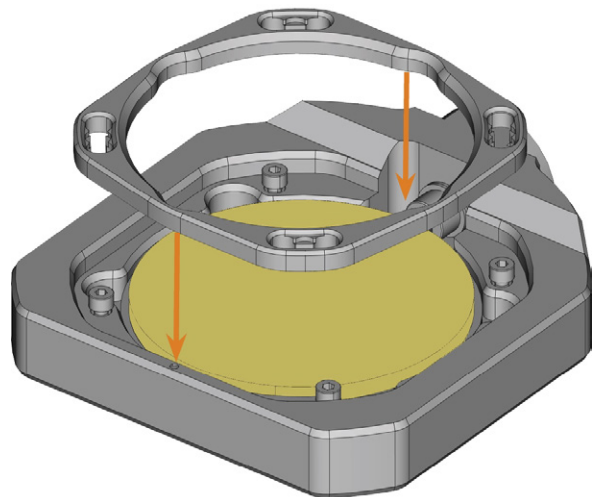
ATTACHING THE DISC WITH THE FIXING RING
